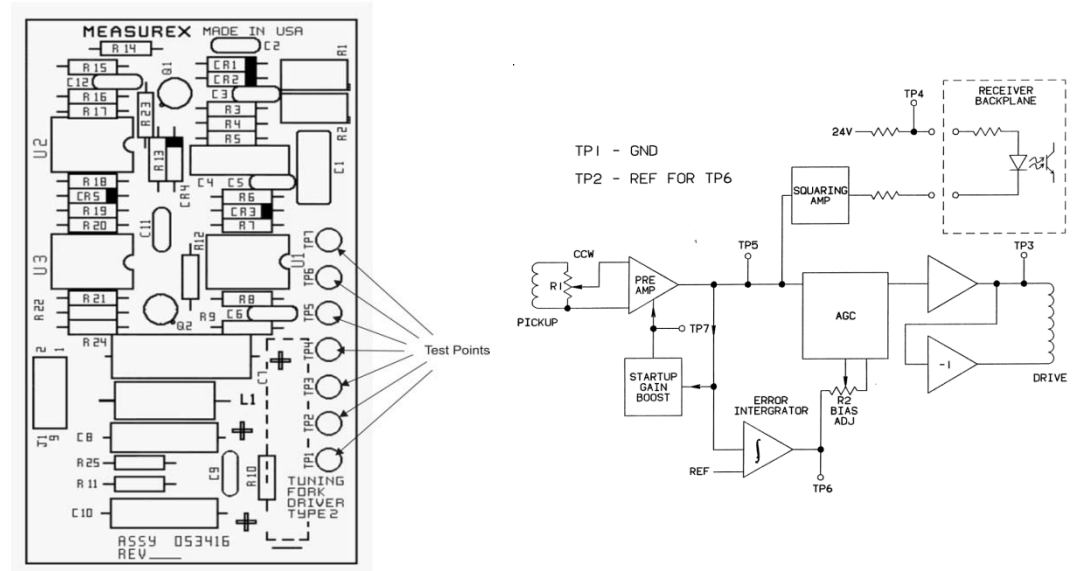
Tuning Fork Driver Board and Block Schematic
